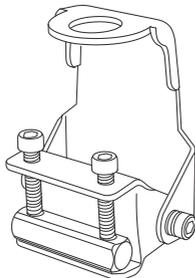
Adjustable roof mount fitting showing locating pin and locating holes.
